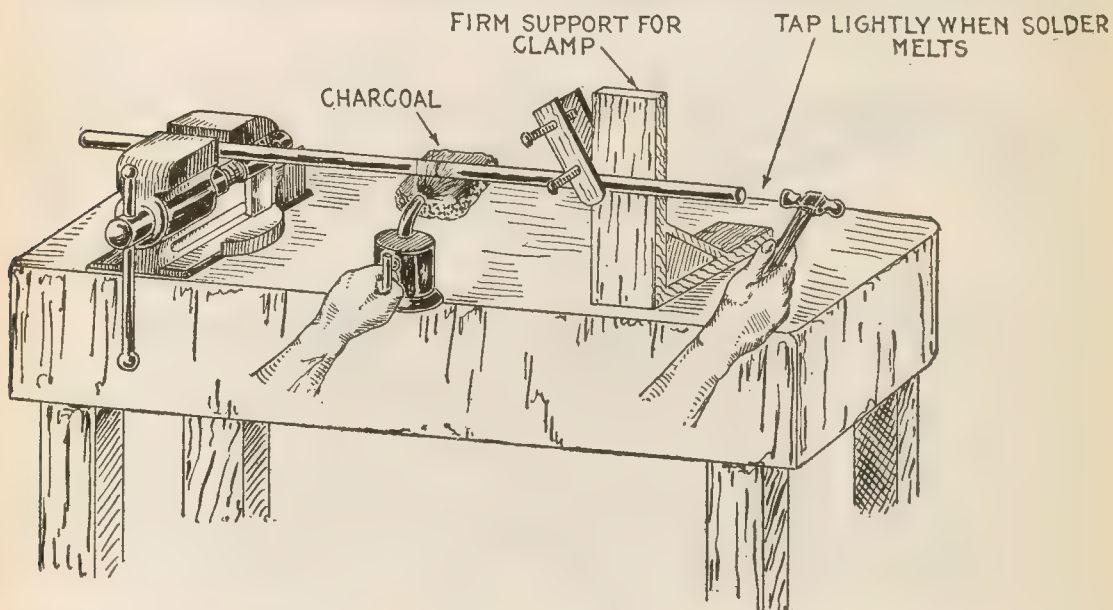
,982.—Butt brazing two lengths of small pipe. After cleaning the ends to be brazed and fluxing, they are clamped in position butt to butt using a vise and clamp as shown, or other means. A little brazing solder is sprinkled over the joint and heat applied. When the pieces are hot enough to melt the solder it must flow into the joint, butt brazing the two pieces. By giving one of the pieces a slight tap on the end, when the solder melts, the surplus solder is squeezed out, making a good and firm joint. If the pipes be large or of considerable length, the heat is quickly conducted away, necessitating a charcoal backing or more adequate means of heating.
